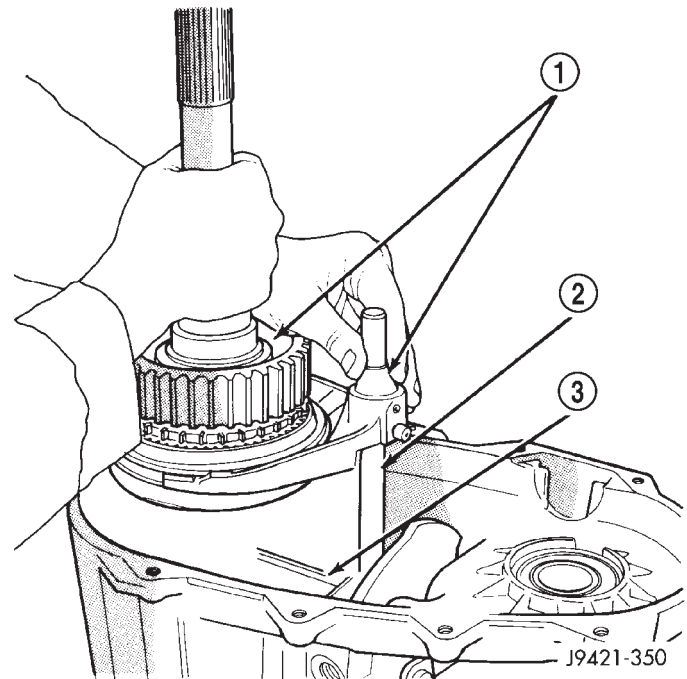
Assembling Mode Fork And Mainshaft1 - SLIDING CLUTCH
